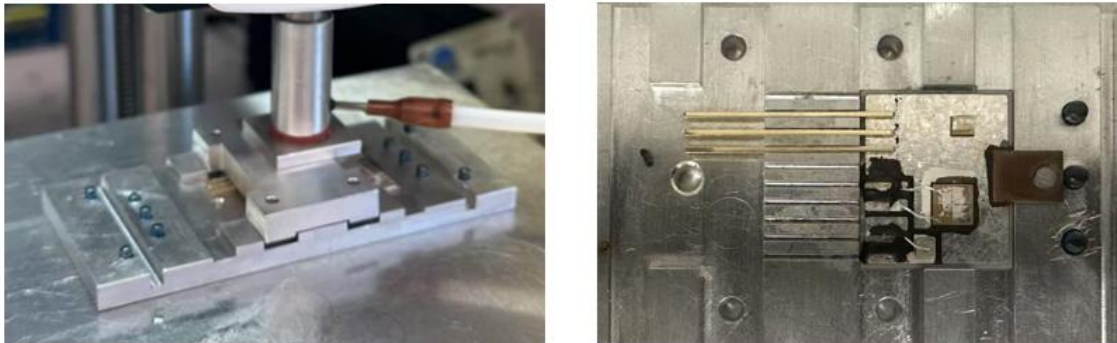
Sintering setup for simultaneous bonding of three Au-finished pins using a customized fixture and aluminum pressure-spreading block.
